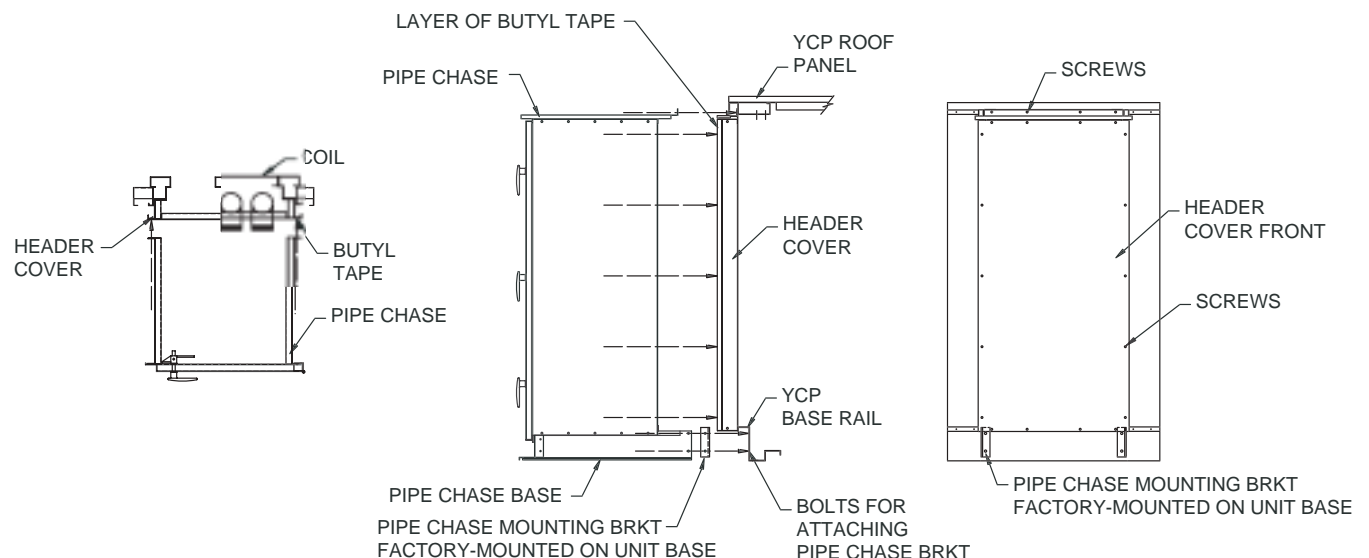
PIPE CHASE ENCLOSURE ASSEMBLY FOR UNITS WITH PIPE CHASE SHIPPED LOOSE
